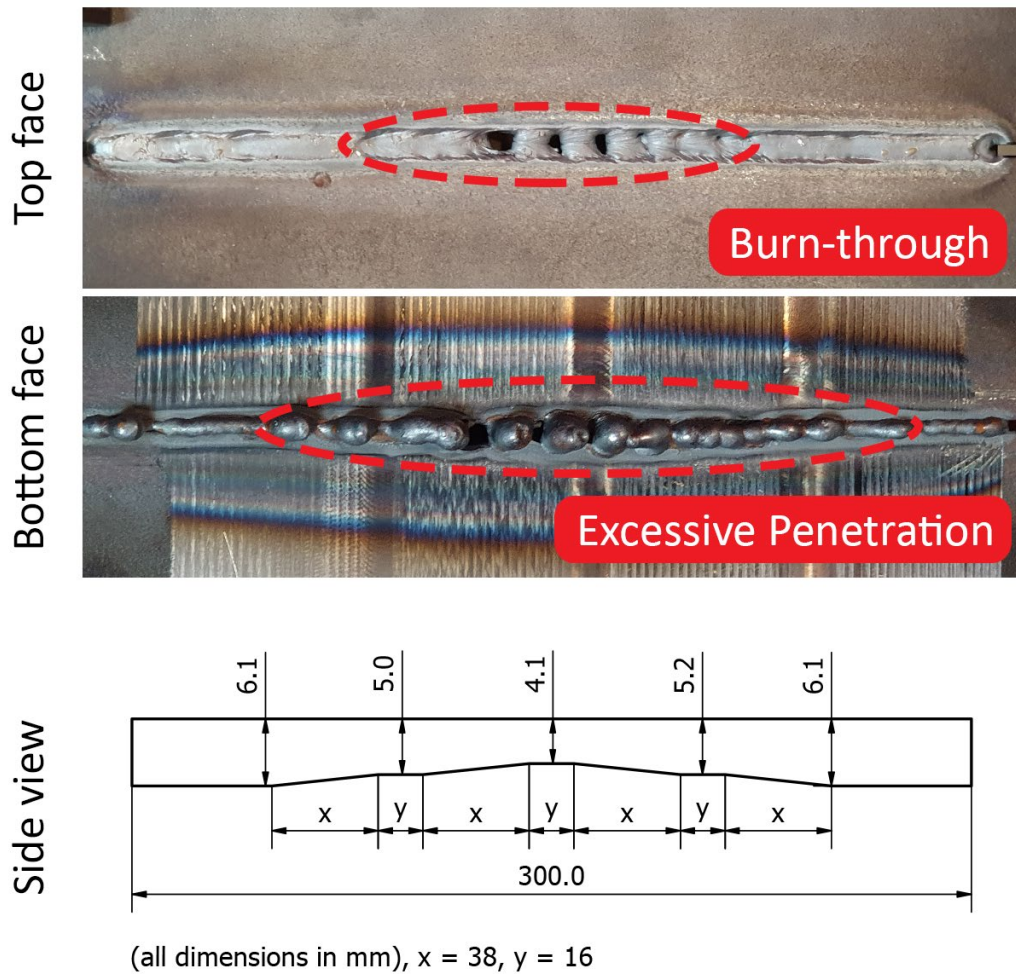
Control sample manufactured with constant welding parameters assuming a constant plate thickness of 6.1 mm, as obtained by a single point measurement with calibrated digital callipers
